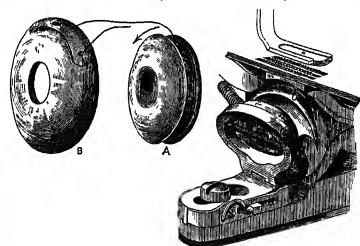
Rotary Hook, Bobbin, and Bobbin Case (Wheeler & Wilson Machine)
